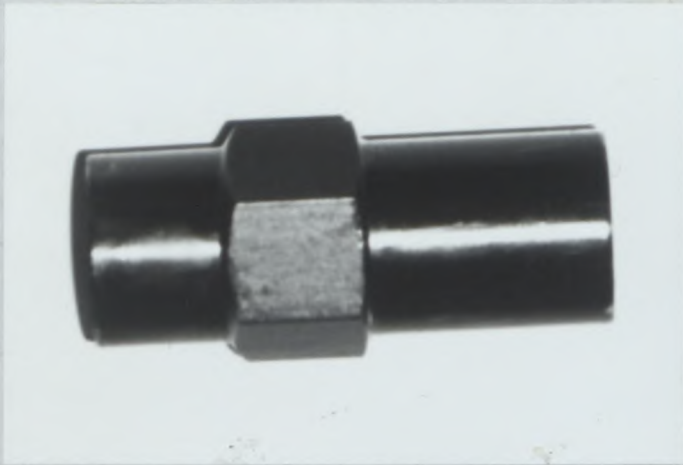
REINFORCED STEERING ROD TYPE B
